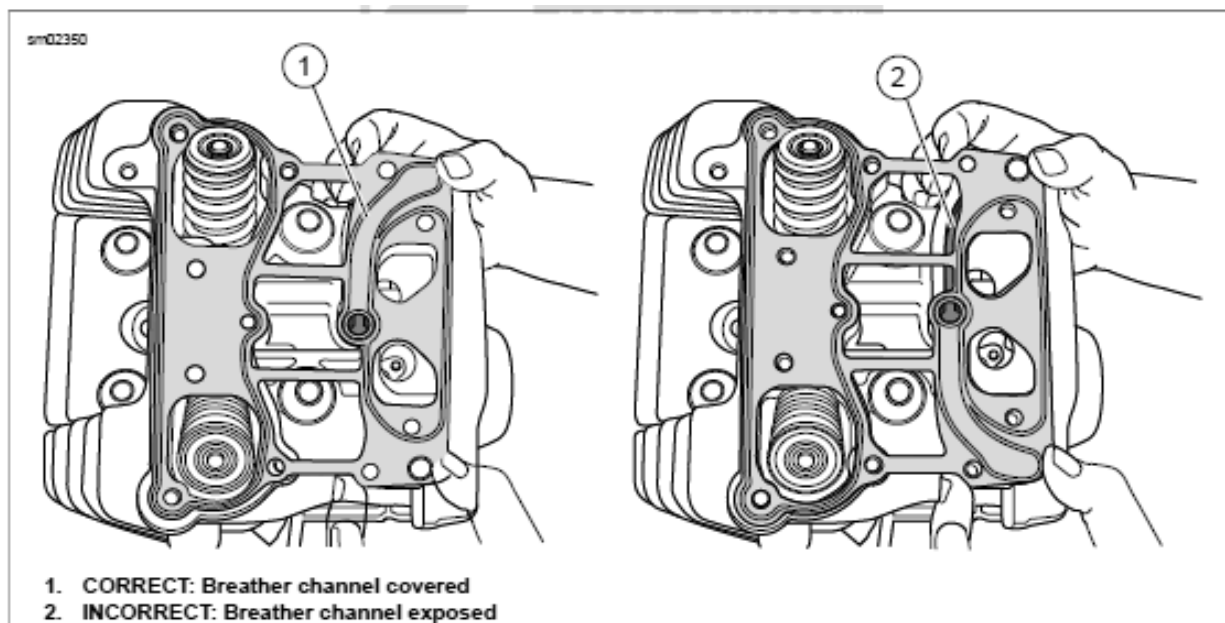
Install Rocker Housing Gasket (Rear Cylinder Shown)
